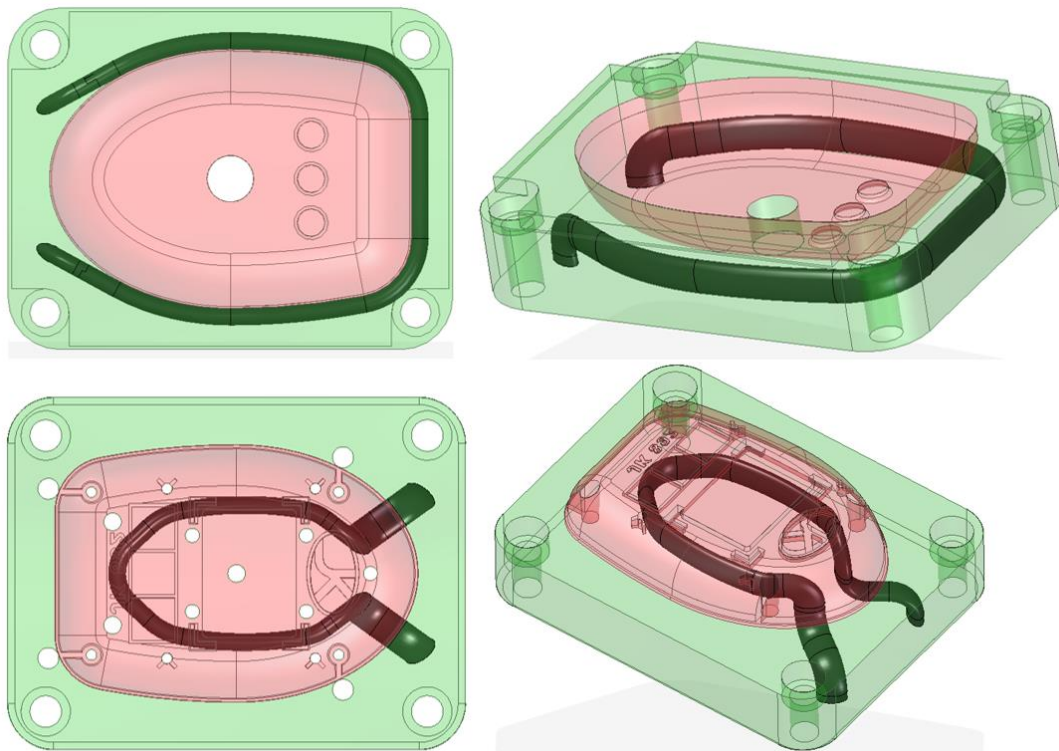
Conformal cooling channel design for the enclosure inserts avoiding mould features such as screw and ejector pin holes.
